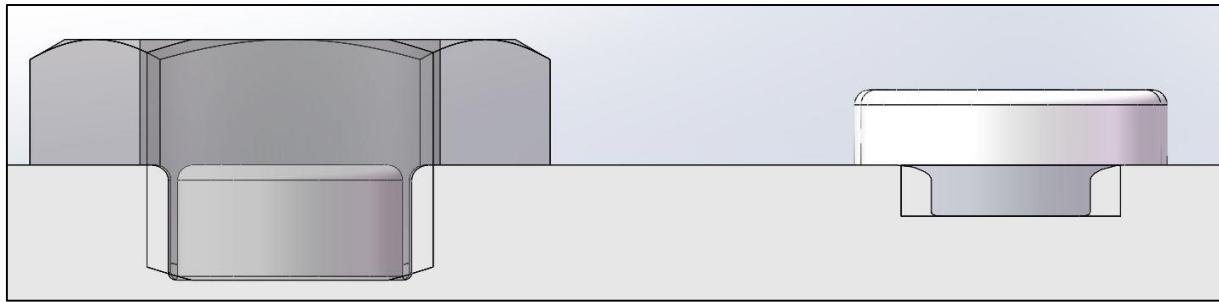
Interference occurs when steering gear nut (left) and steering gear washer (right) is inserted into the left hand suspension hardware fixture. [59]
